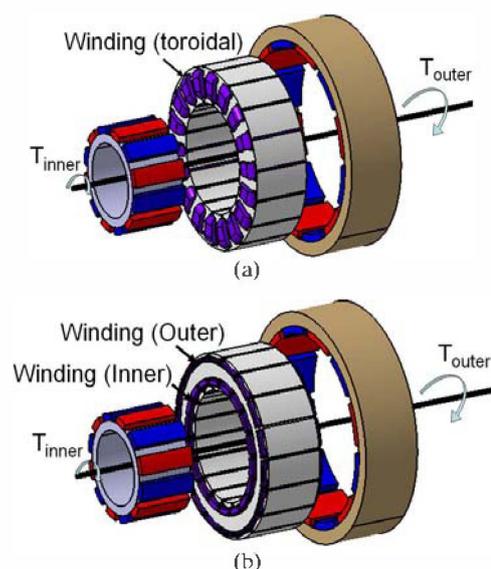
Exploded view of (a) toroidally and (b) radially wound dual-rotor machines with 12 rotor poles and 18 stator slots.
